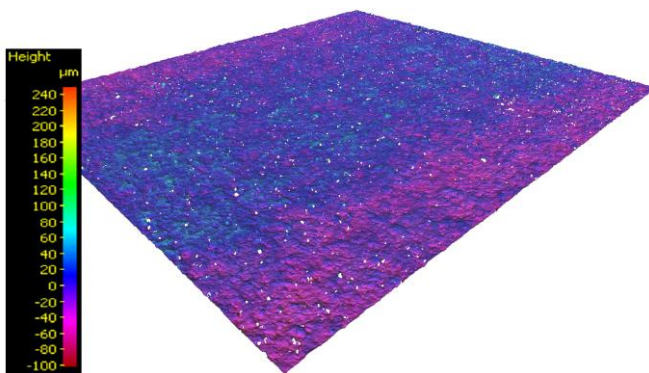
View of the primary product surface of the EOS Formiga P100 printer
